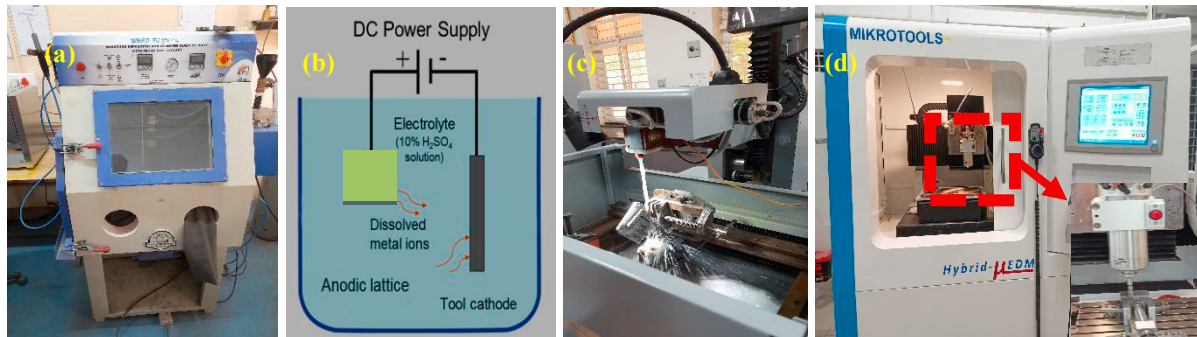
Different post processing techniques adopted (a) sand blasting (b) chemical anodizing (c) wire-EDM and (d) micro milling
